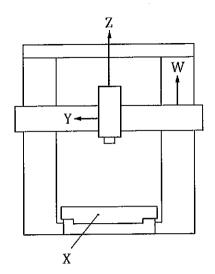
Portal type machine tool with one spindle head on the cross-rail
